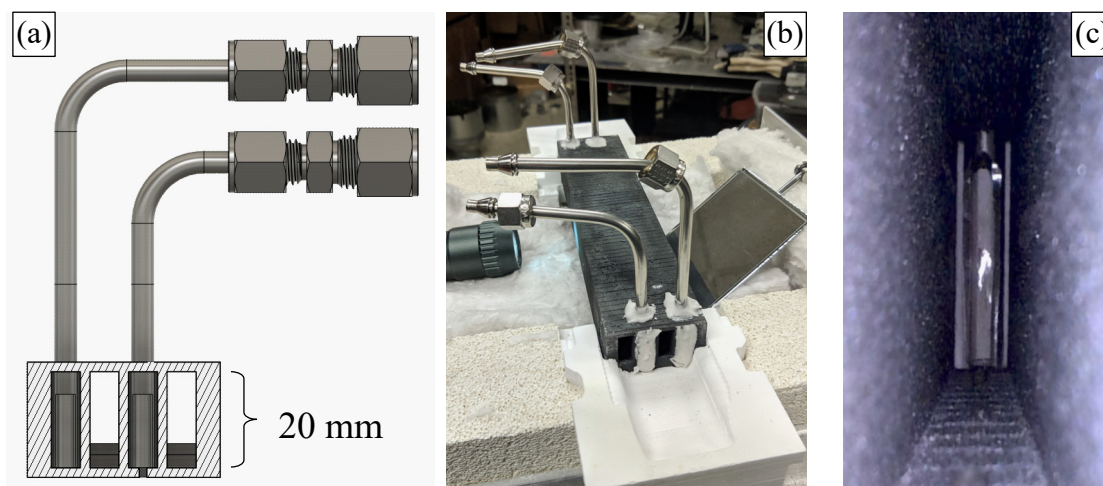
Inlet/Outlet geometry: a) cross-section view b) reactor during assembly c) internal view of the inlet pipe
